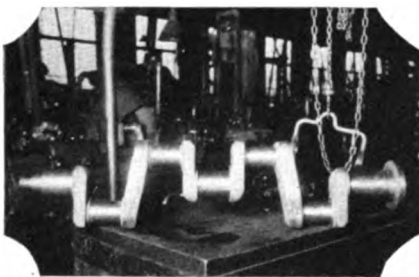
Grinding Four Crank Pins on a Norton Crank Pin Grinding Machine
